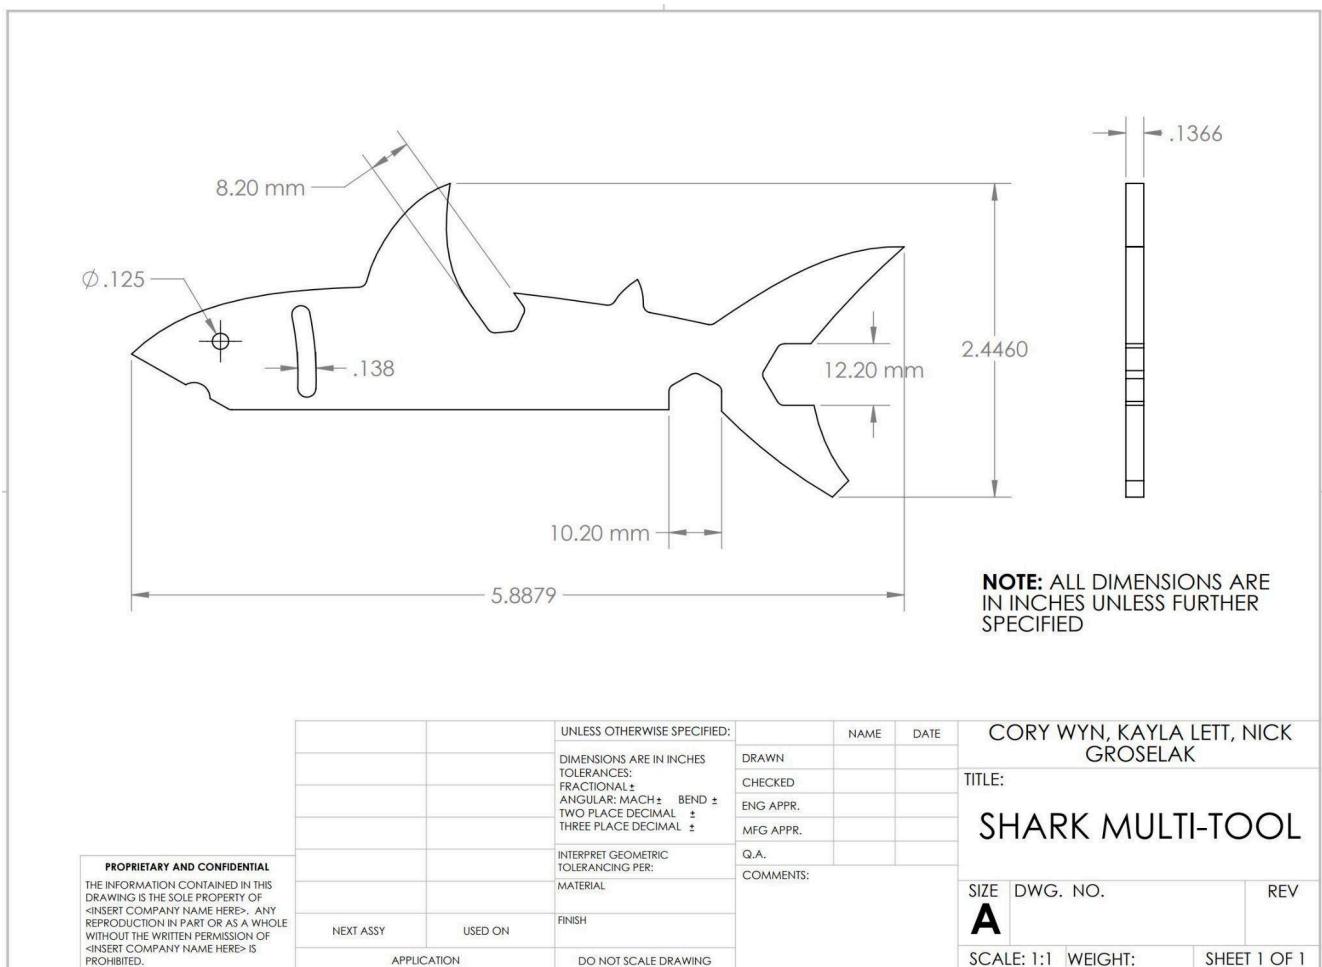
SolidWorks drawing of Shark Multi-Tool
